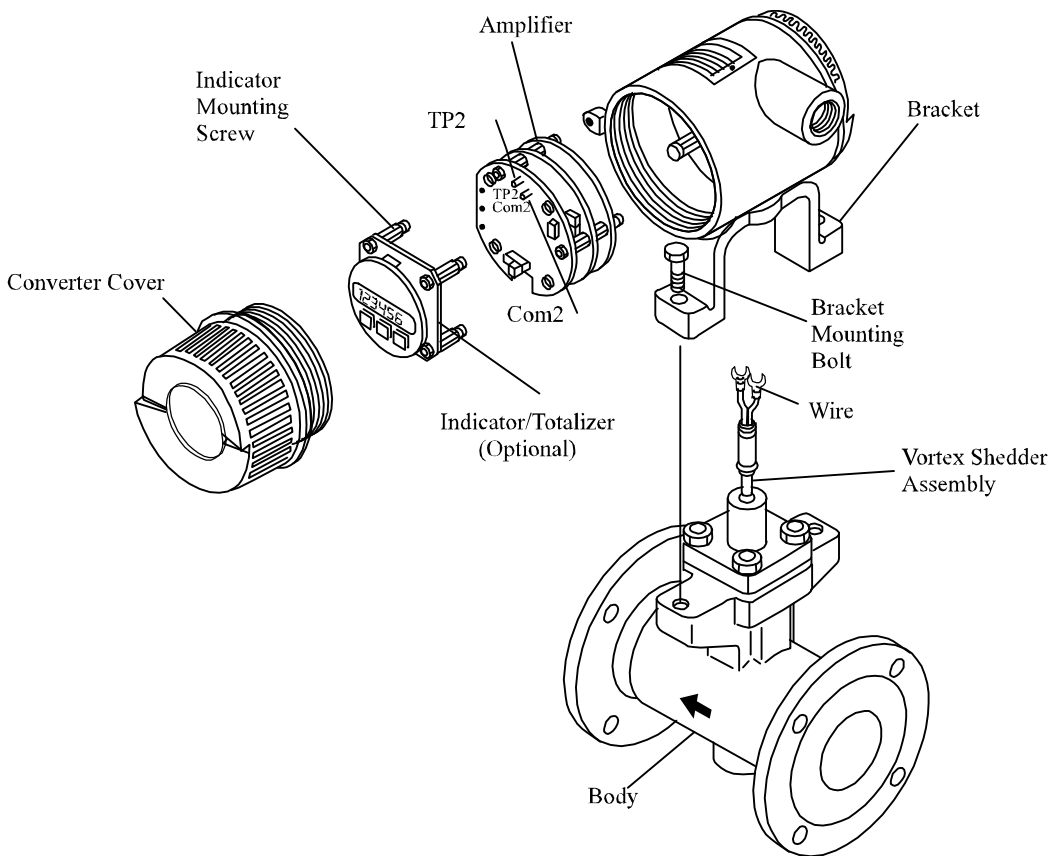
Disassembling and Reassembling the Vortex Shedder Assembly
